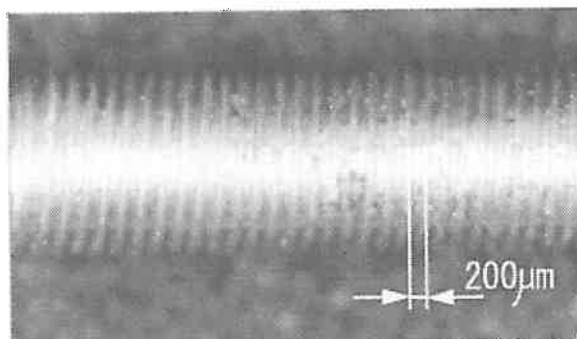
Enlarged photograph of the micro-screw showed in figure 7
